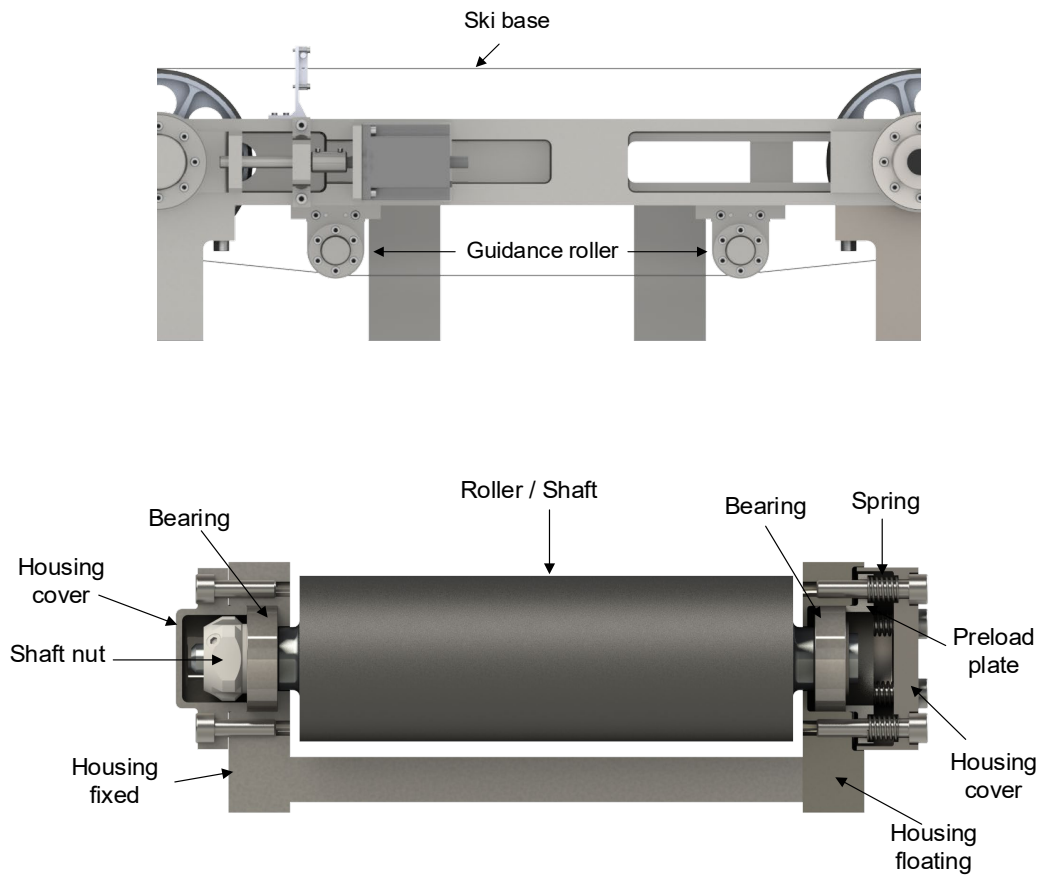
Guidance roller in installed condition (top) and roller in cross section view (bottom)
